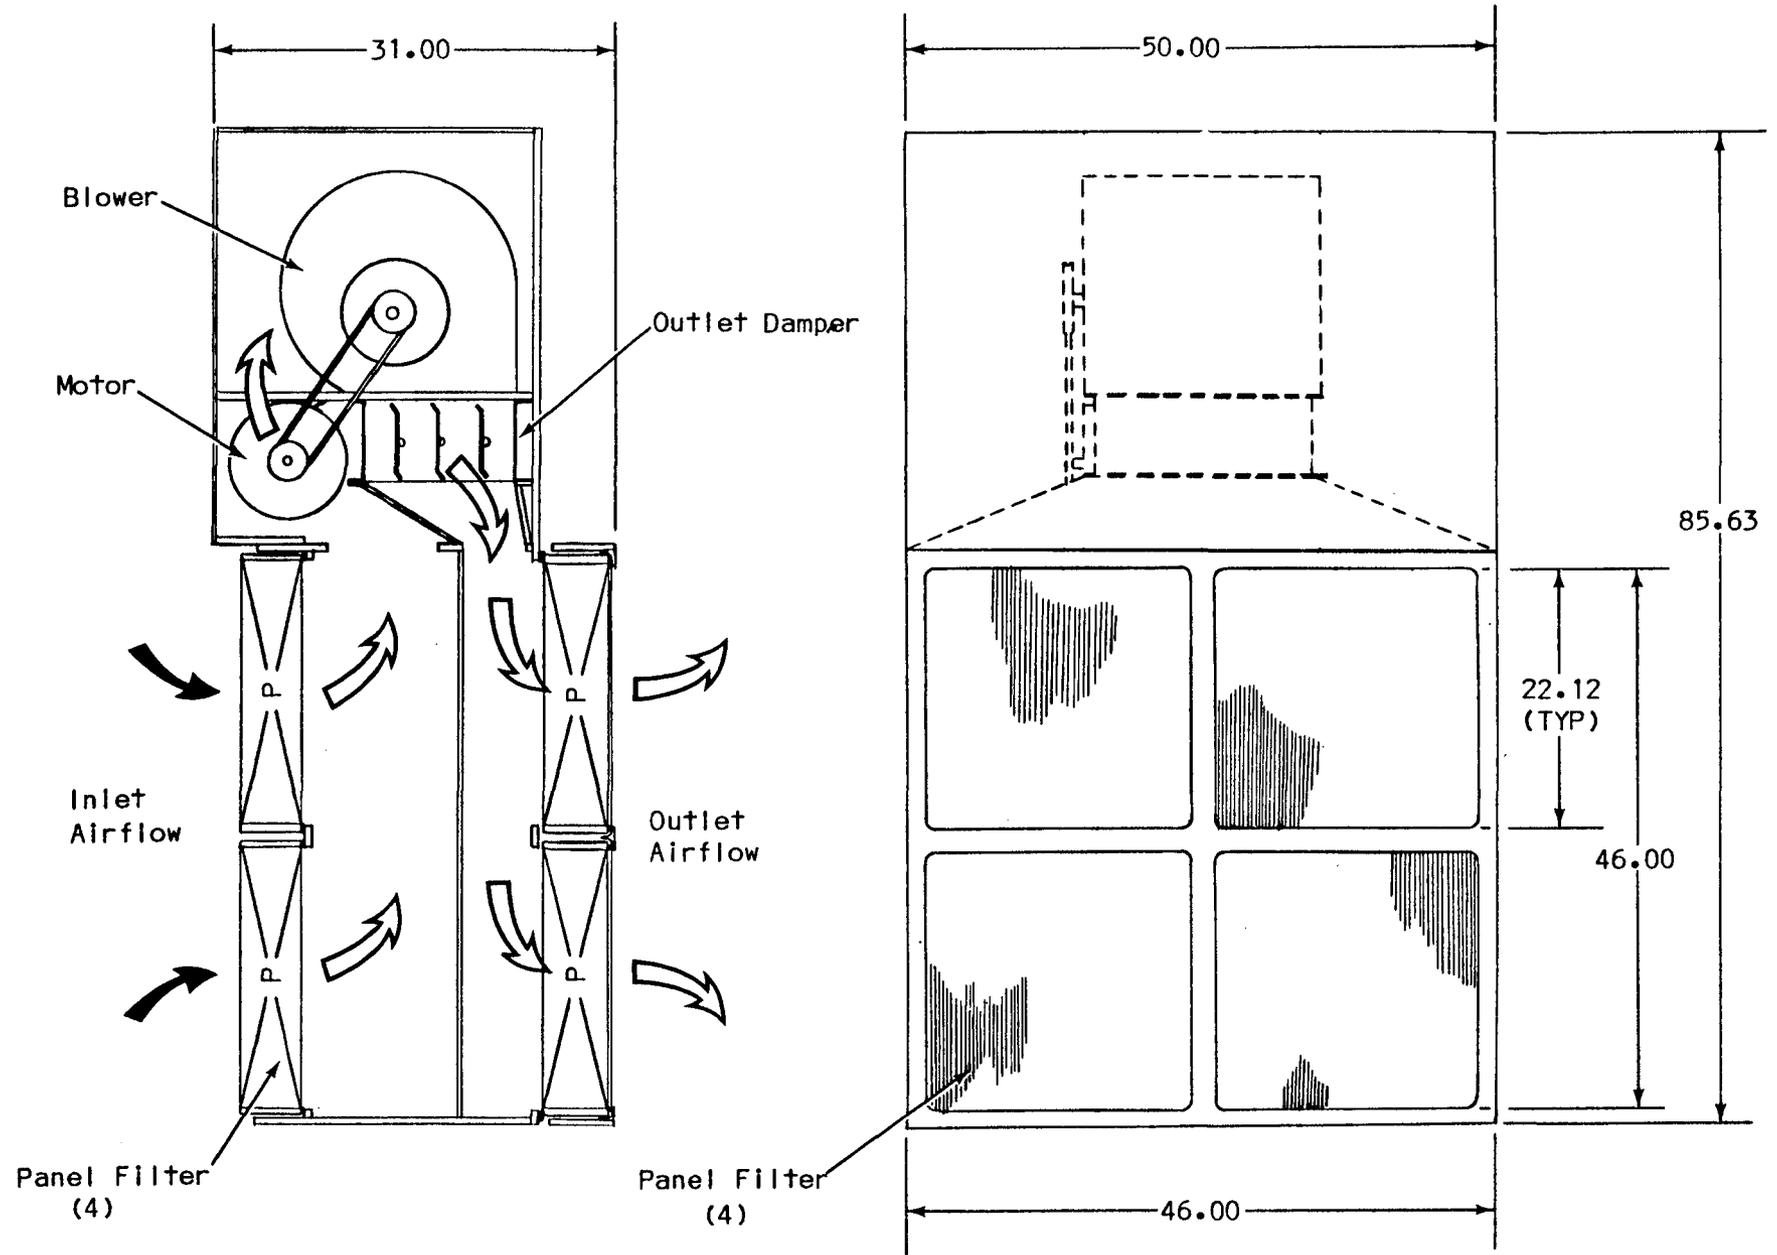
Mock-Up of Self-Contained Mine Mill Air Curtain
